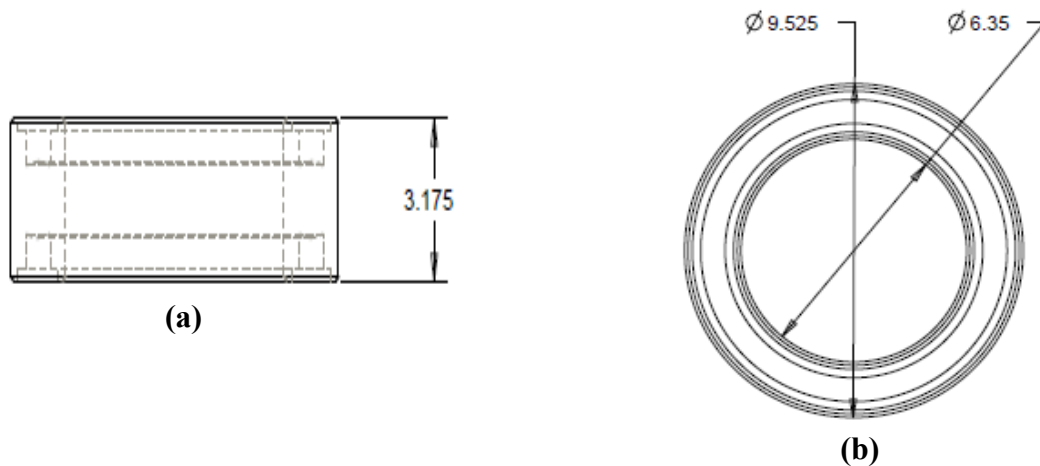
RBI-168zz metal shielded bearing drawings, measurements are in mm. (a) Top view (b) Front view.
